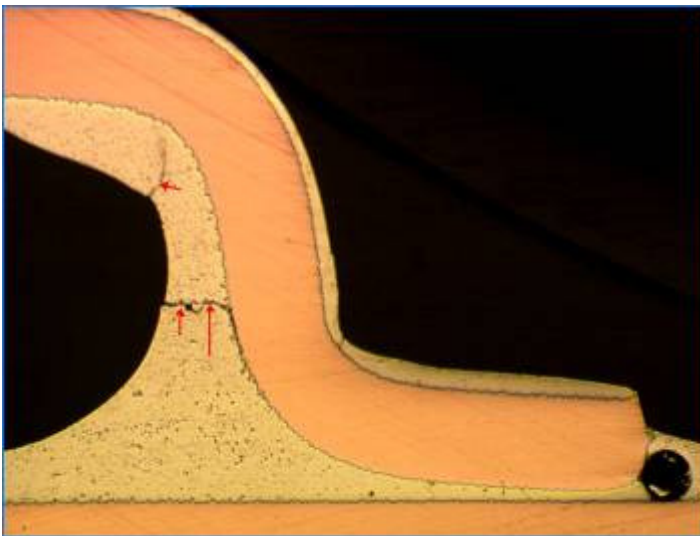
cross section, SN63, U41, right lead solder crack, 100x
